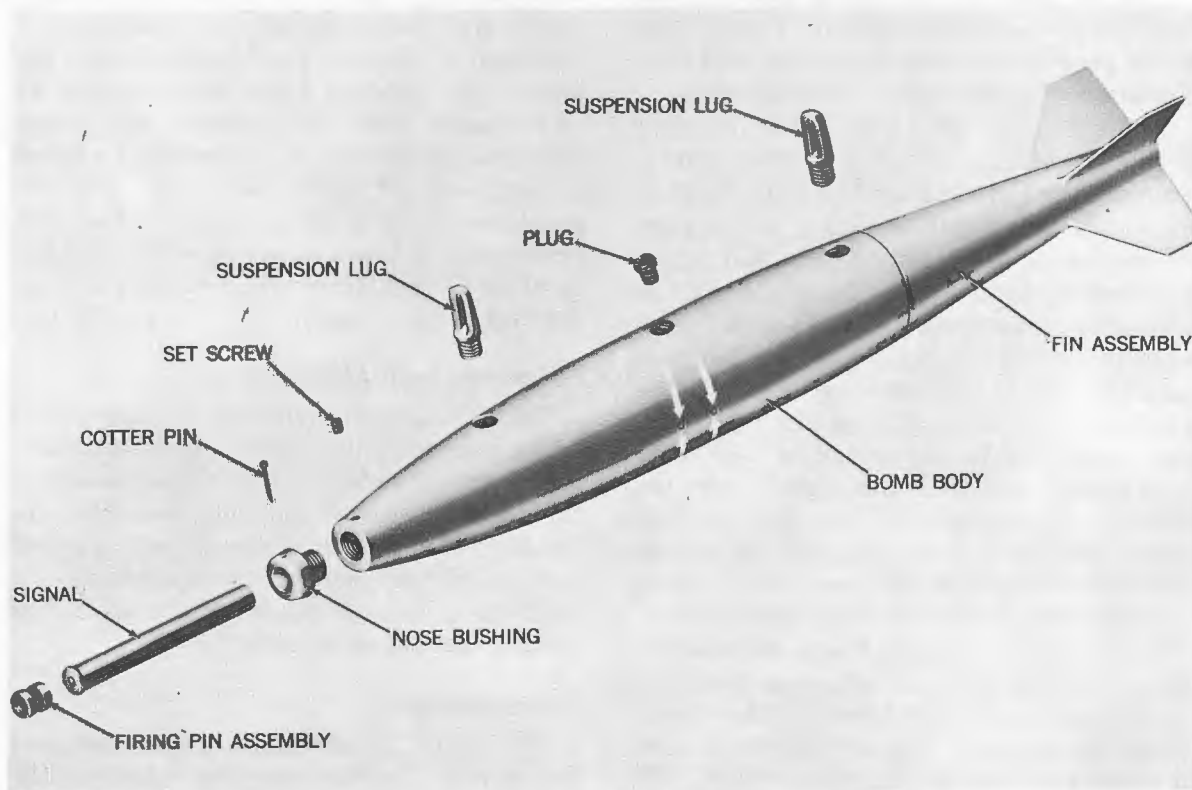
56-lb Practice Bomb Mk 89 Mod 1, Exploded View.
